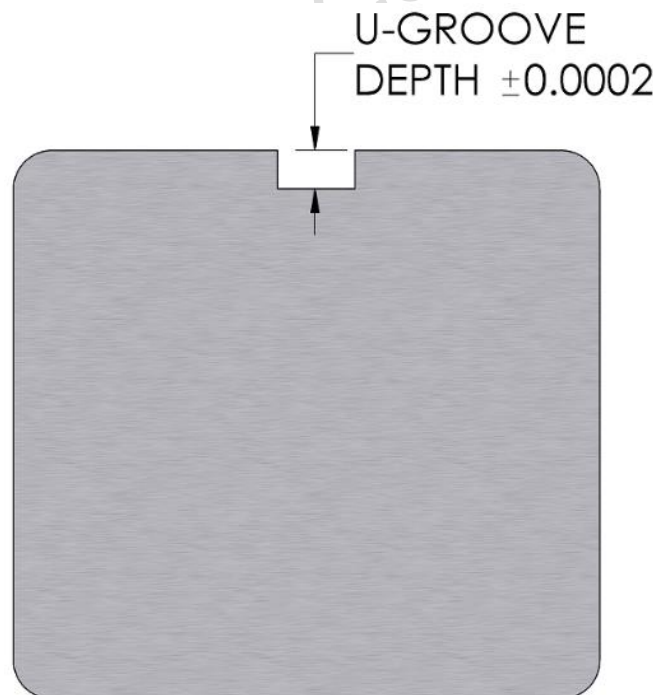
Round Thread Height Gauge Setting Standard ($3/4$ in. TPF Buttress Thread Height Standard)
